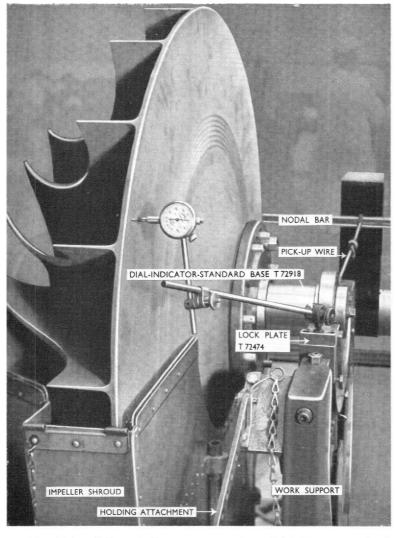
Using dial test indicator supported on dial-indicator-standard base T.72918 and lockplate T.72474 to check rear face of impeller for swash, in Gisholt 3 U.J.P. machine.
